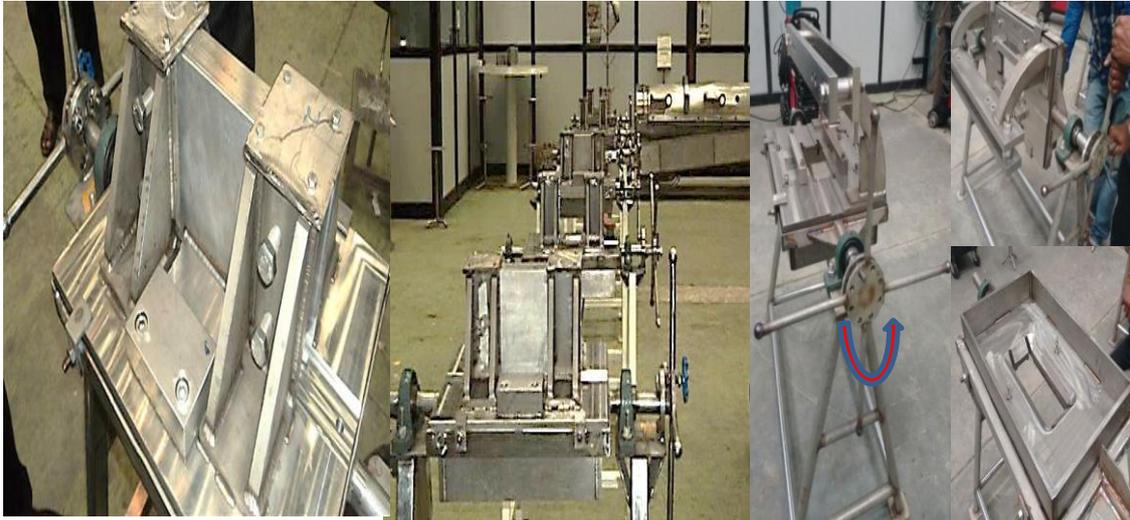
Welding fixtures for poloidal segment (PS) 1 and 2.
